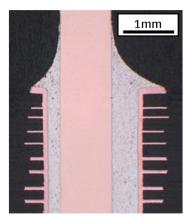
Cross-section of "Time Zero" SnPb Soldered Shorting Jumper Confirming Solder Fill and Wetting
